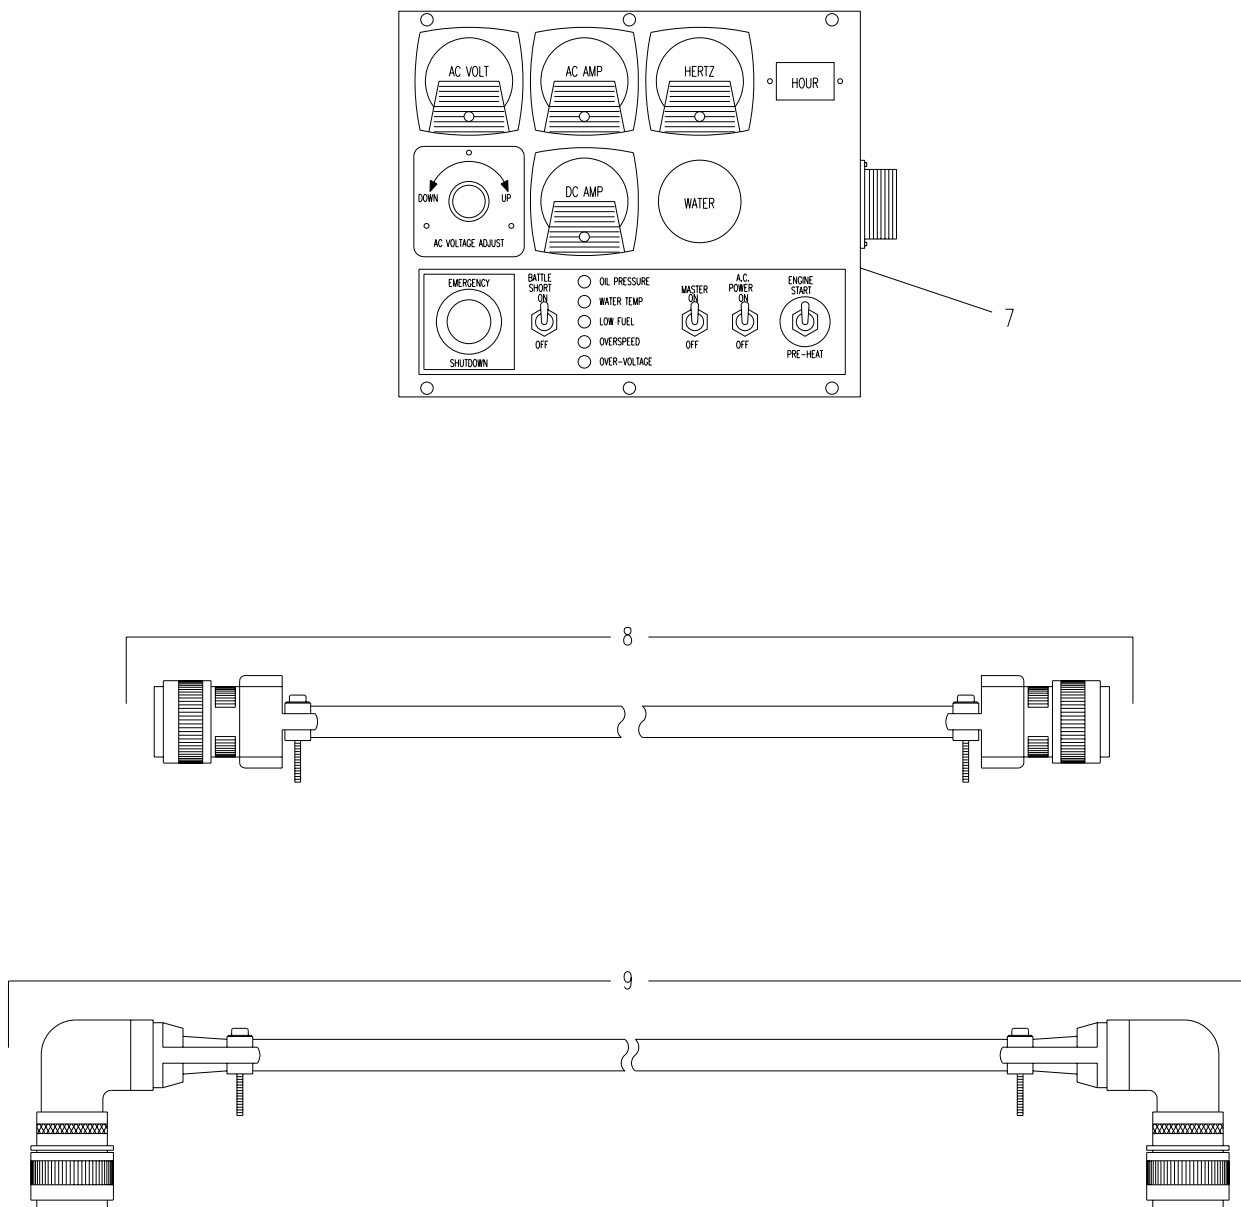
Auxiliary Power Unit Major Components (Sheet 2)
